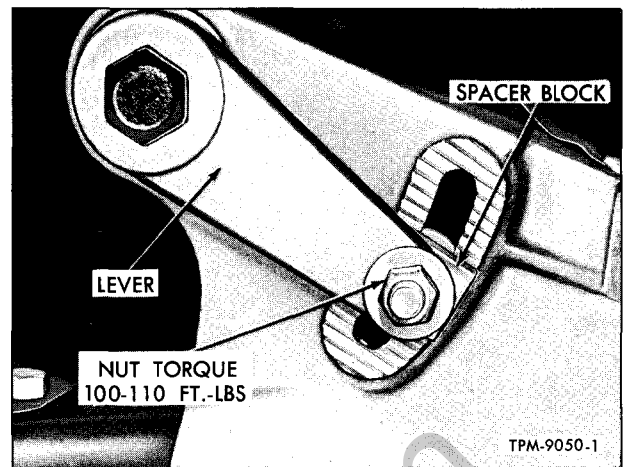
Torsion Bar Tension Adjustment Lever Installed
